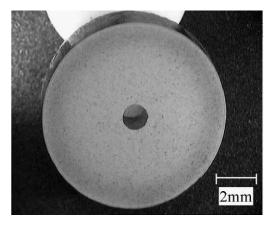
Hole drilled in 30 wt.%LaPO₄/Al₂O₃ composite using cemented carbide drill.
